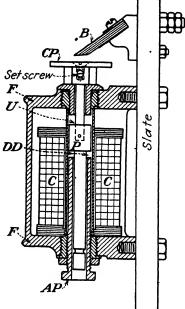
Lock-out contactor of the solenoid type with a series coil.
